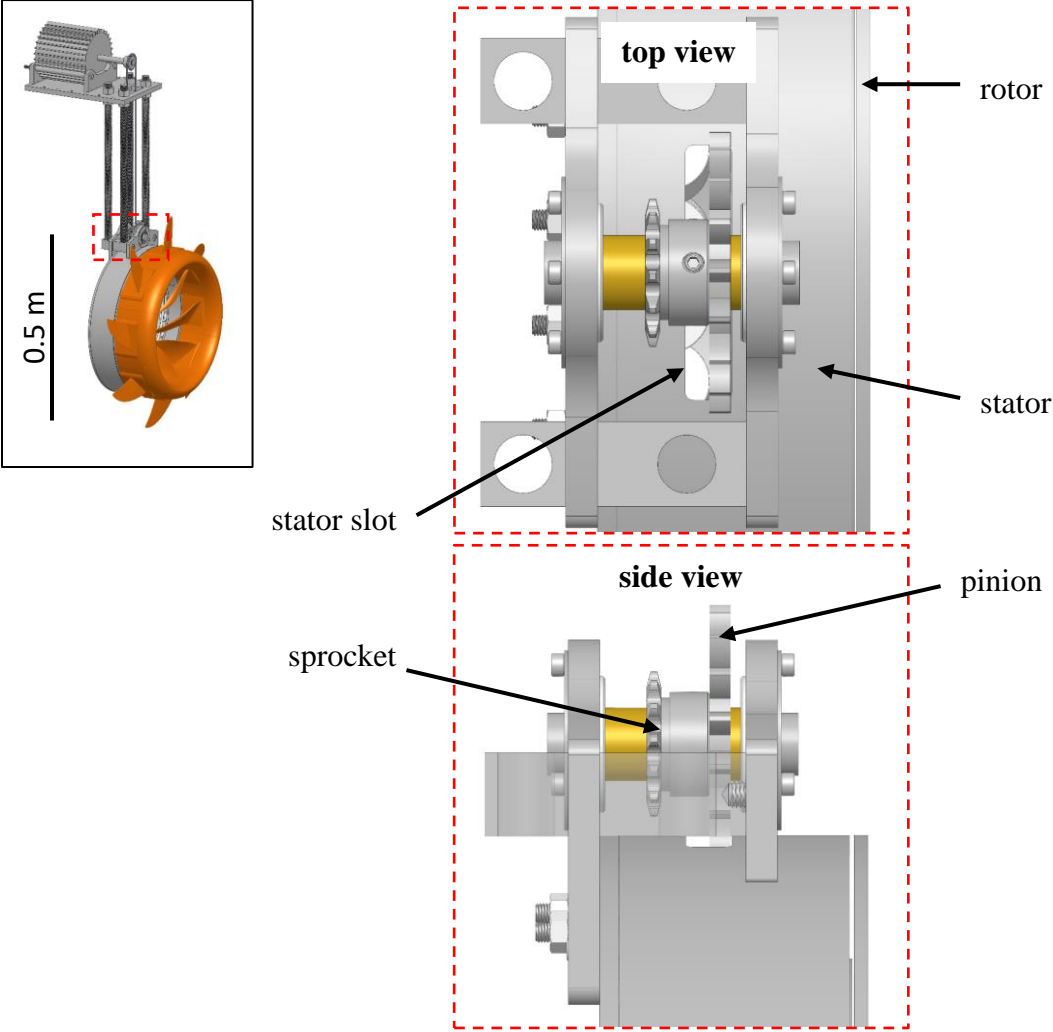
Detailed model views of the turbine gear box from the top and side perspective. Note that the outer part of the gear box has been made transparent in the side view to more clearly show all the shaft components.
